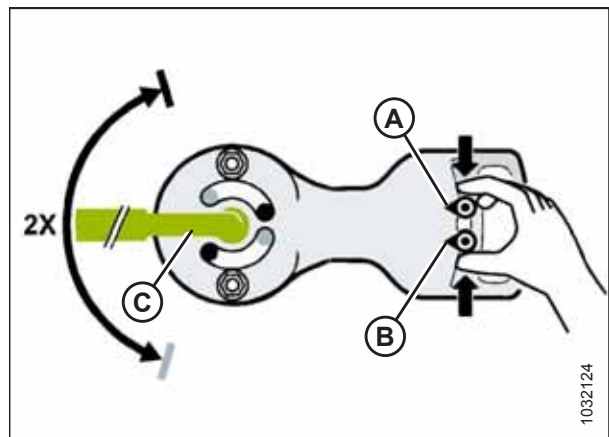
Wing Balance Adjustment – Left Side Shown
